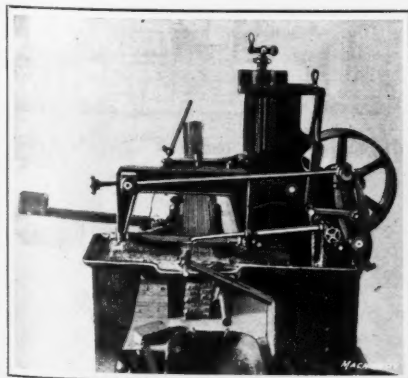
Cutting off Key Blanks on "Marvel" Hacksaw Machines built by Armstrong-Blum Mfg. Co.
